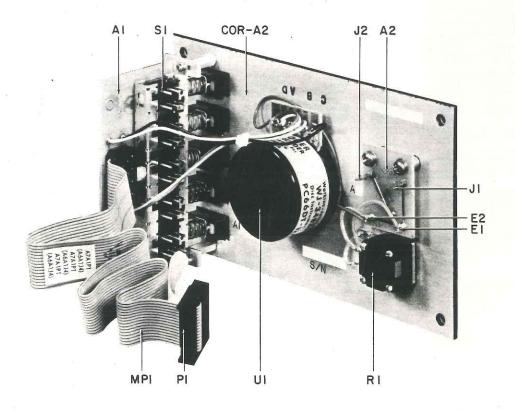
Type 796044 Manual Tuning Module (COR-A2), Location of Components, Rear View
